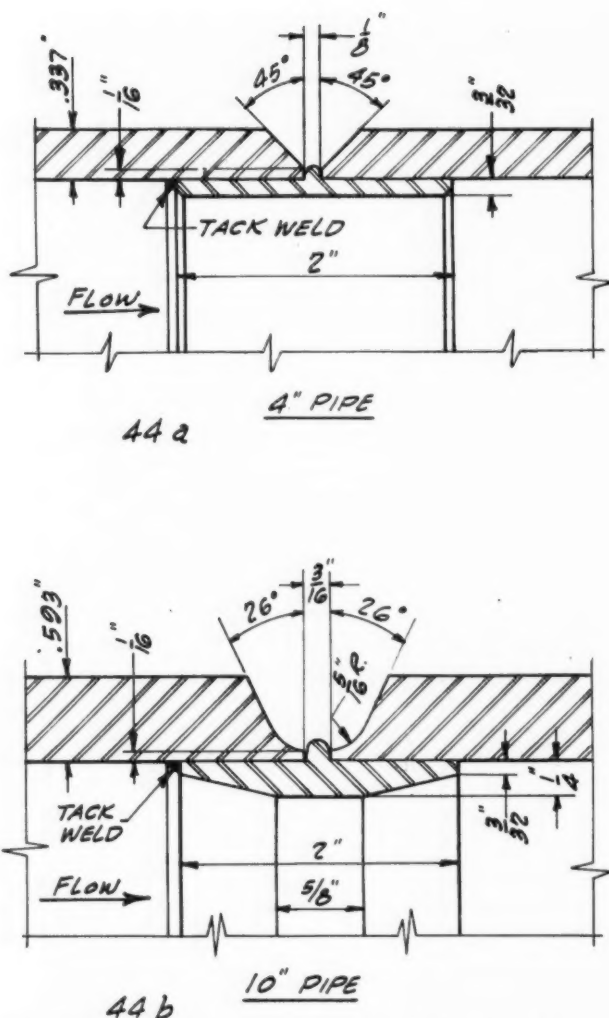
Details of pipe level and backing ring, 4-in. pipe
